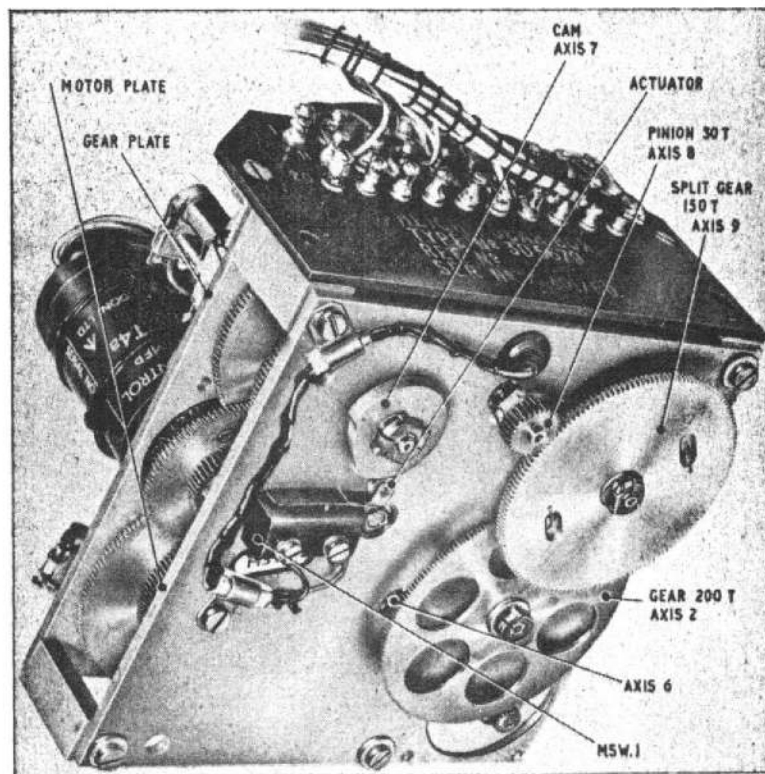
Height gearbox assembly (G3)—view B (pre-mod. ADS/130)
